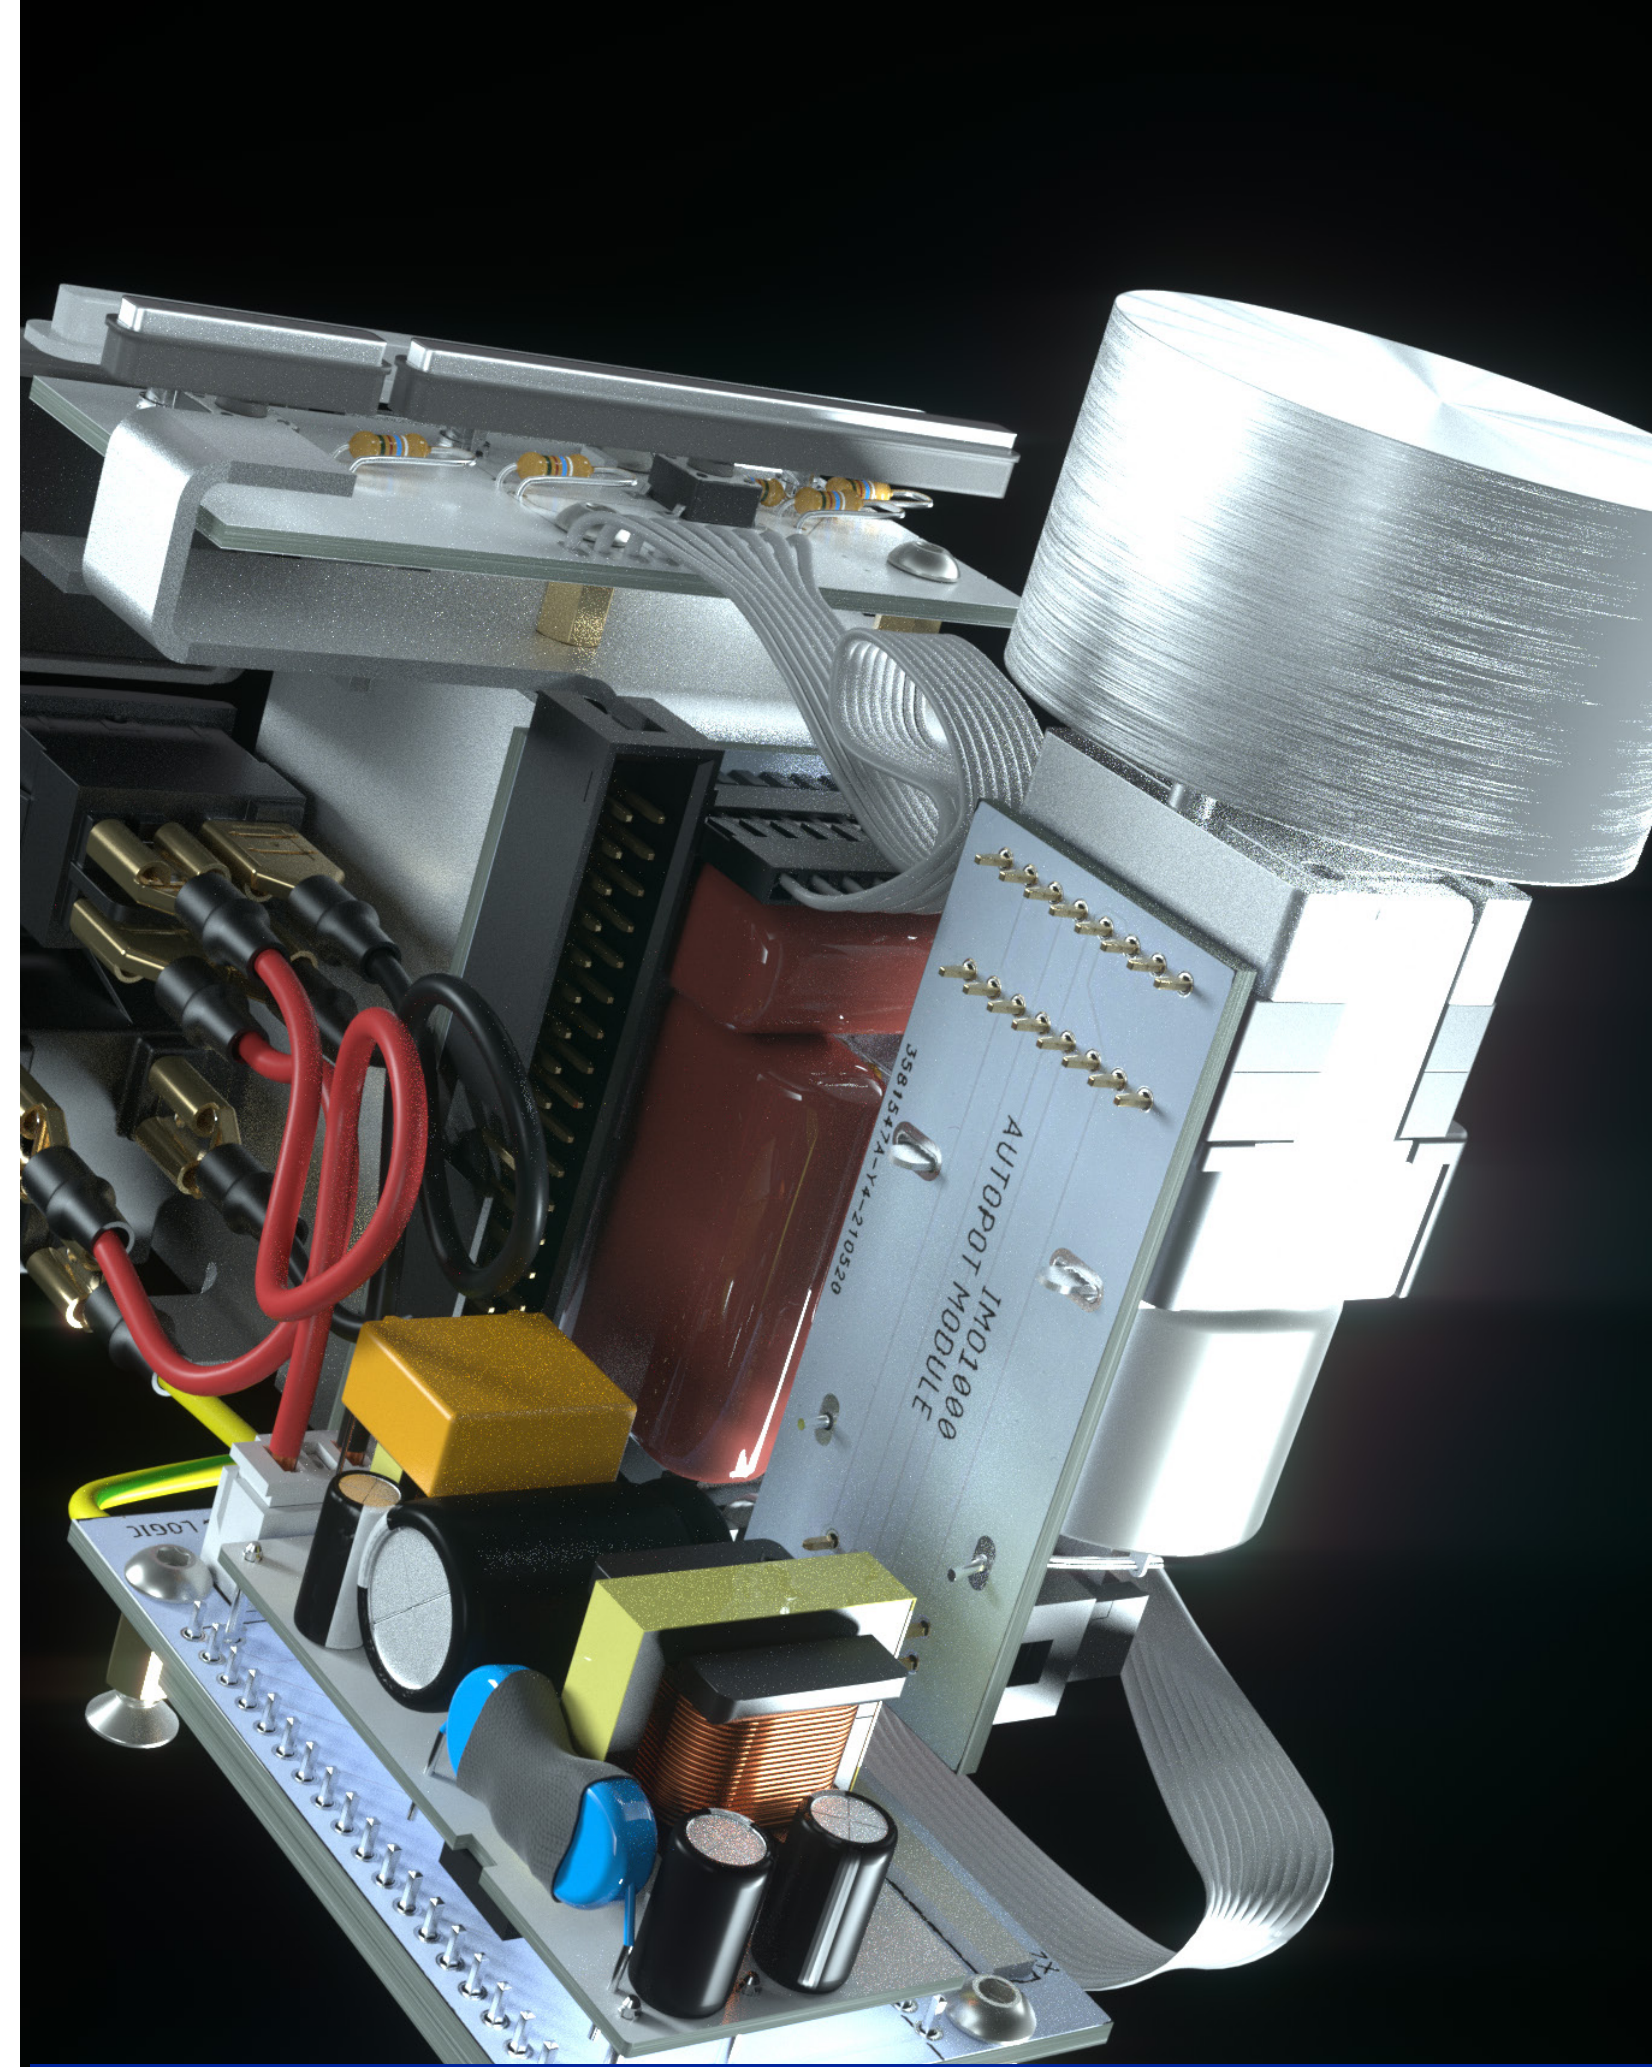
Floating view of the complete electronics assembly of the Master module.
